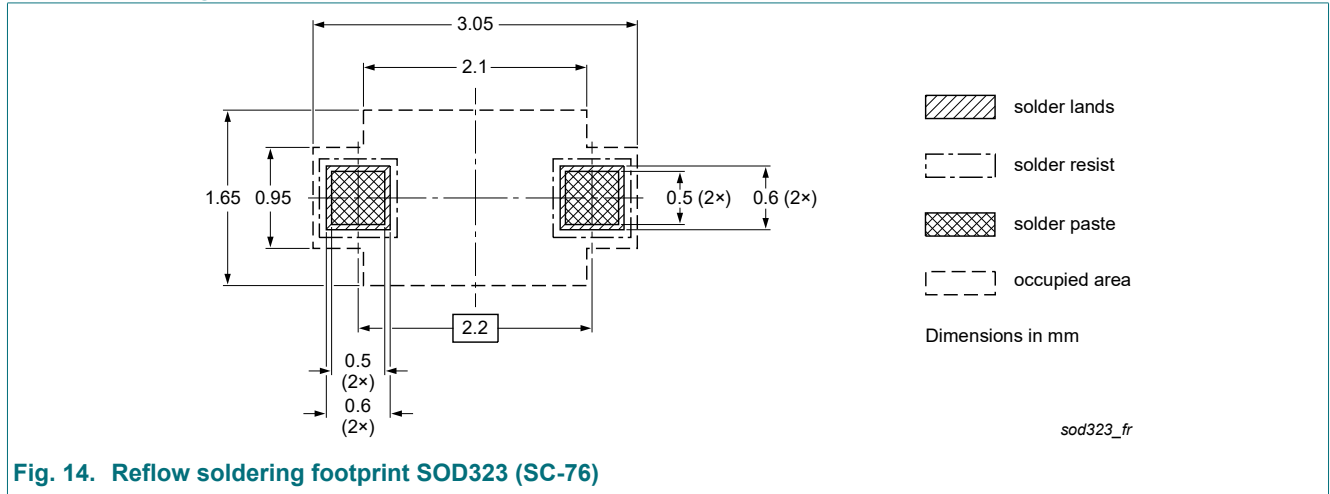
Reflow soldering footprint SOD323 (SC-76)
